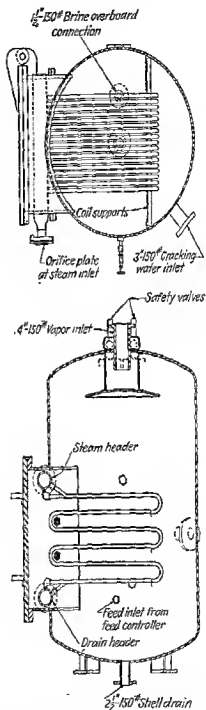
Single-effect evaporator—horizontal section and sectional elevation
